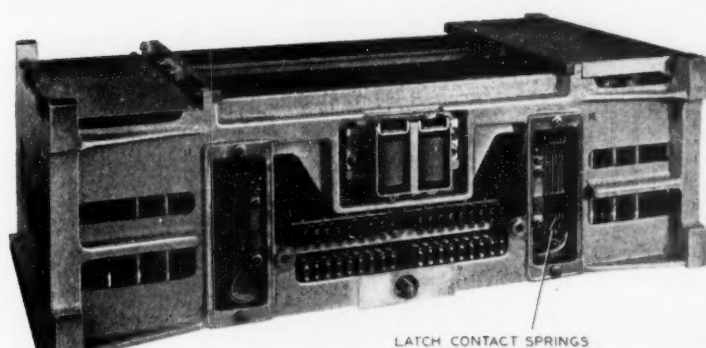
Jack side of dynamic unit showing latch contact springs.
